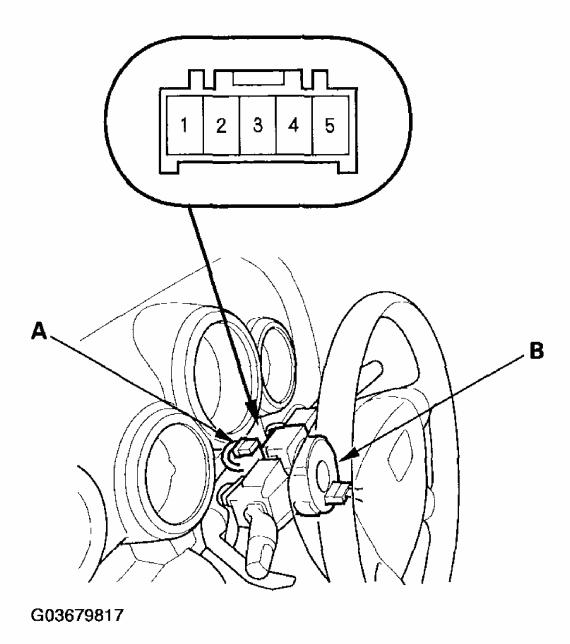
Disconnecting Dashboard Wire Harness B 5P Connector Courtesy of AMERICAN HONDA MOTOR CO., INC.
